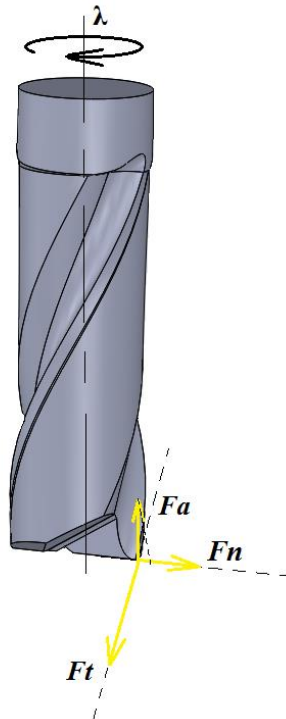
Cutting tool and respective cutting forces F_t , F_n and F_a in the cutting tool coordinate system
